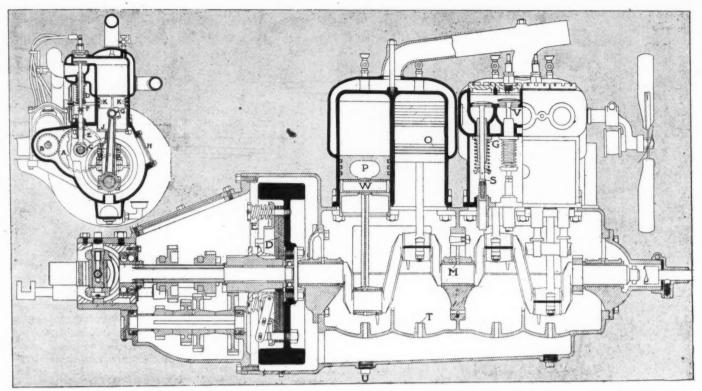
Sectional views of the motor, clutch and gearset showing the distinguishing features of design common to all models
